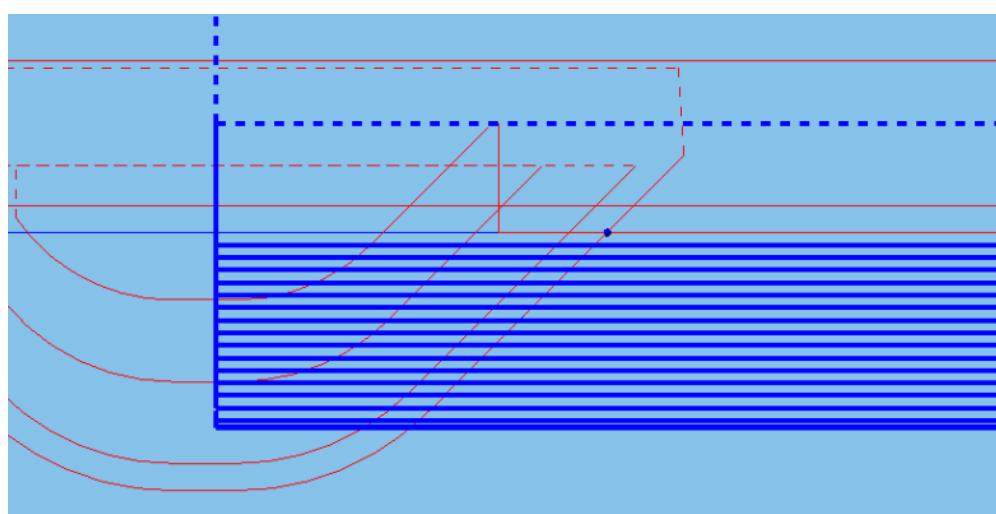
Tool trajectories in Esprit CAM for radial flank infeed penetration method (from the right side) during external thread turning.
